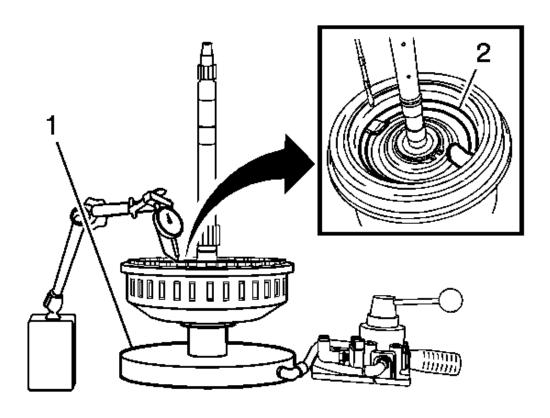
3-5 and Reverse Clutch Plate Installation Courtesy of GENERAL MOTORS CORP.
